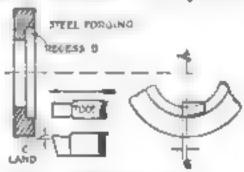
Without a "land" at C, the recessing tool would dig in hadly
